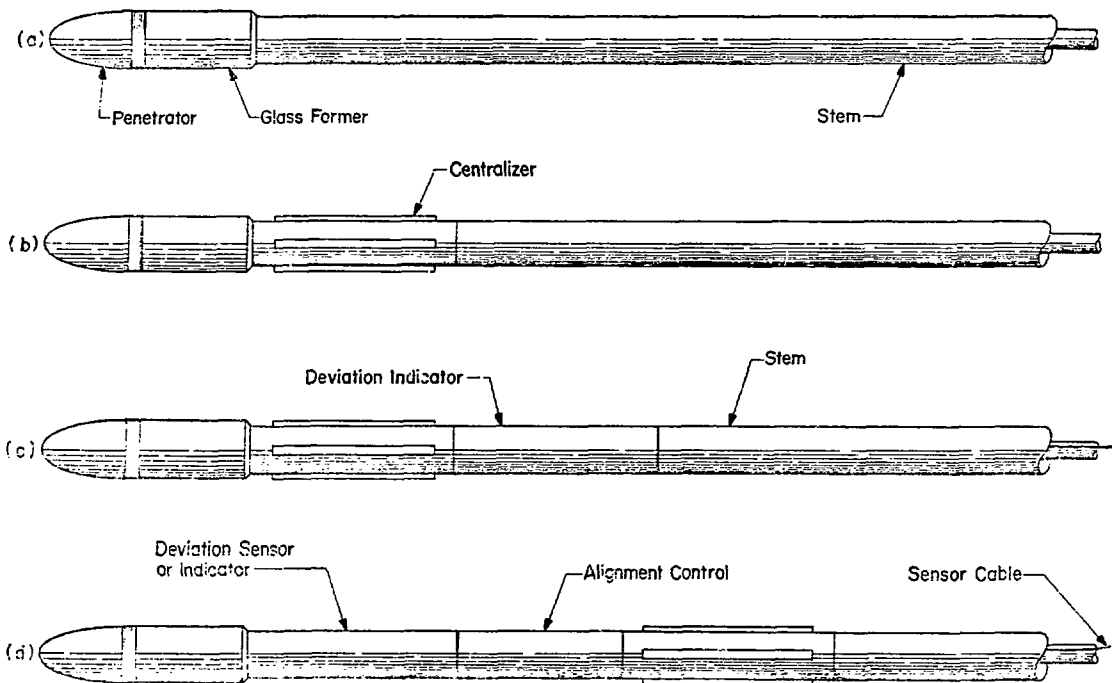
Hole-forming assemblies: (a) simplest HFA-penetrator, glass former, and stem; (b) addition of centralizer; (c) additional deviation indicator; (d) complete assembly with alignment control.
